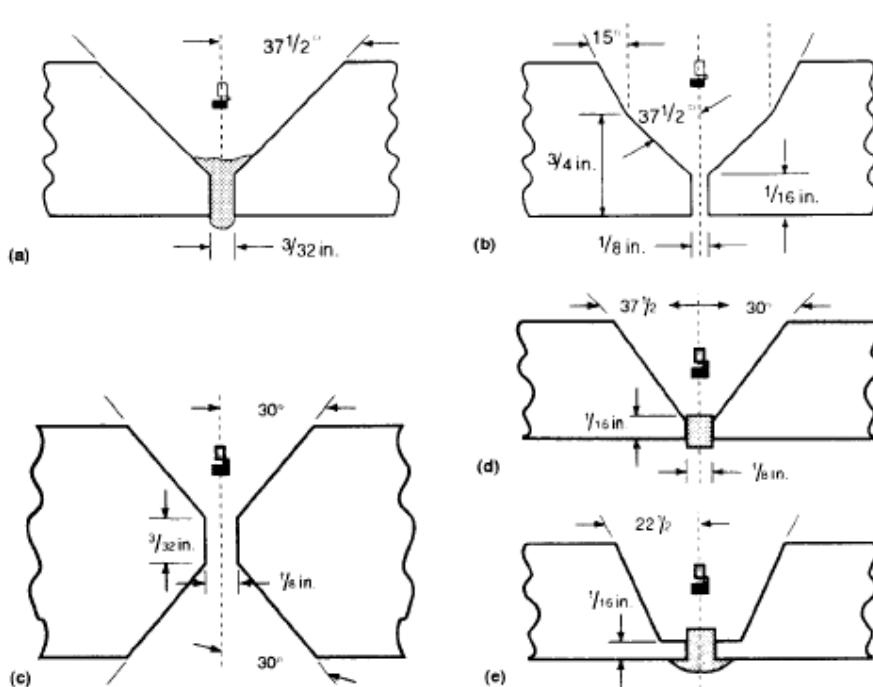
Selected joint configurations and welding inserts used in GTAW processes. (a) Y-type insert, $\frac{3}{32}$ in., for indexing when accessibility is limited; no land required. (b) Compound bevel with open root, $\frac{3}{4}$ in. gap; land, $\frac{1}{16}$ in. thick. Washer-type insert ($\frac{1}{8} \times \frac{3}{32}$ in.) should be used if insert required. (c) Inside diameter/ outside diameter preparation with open root, $\frac{3}{8}$ in. gap; land, $\frac{3}{32}$ in. thick. Washer-type insert ($\frac{1}{8} \times \frac{3}{32}$ in.) should be used if insert required. (d) Washer-type insert ($\frac{1}{8} \times \frac{3}{32}$ in.); land, $\frac{1}{16}$ in. thick. (e) J prep mushroom insert; land, $\frac{1}{16}$ in. thick; extended land, $\frac{3}{32}$ in. long
